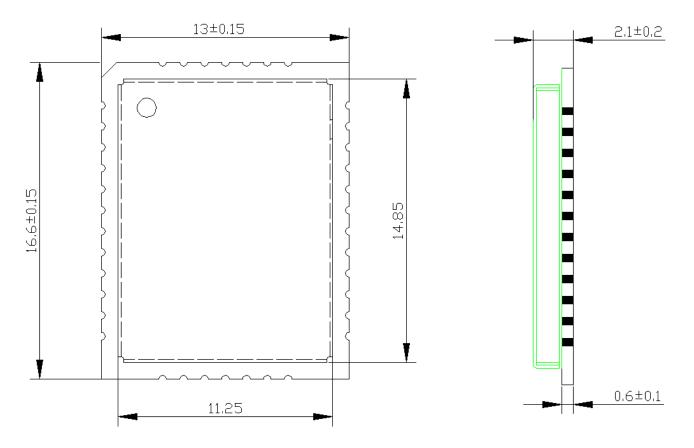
FC20 Top and Side Dimensions (Unit: mm)
